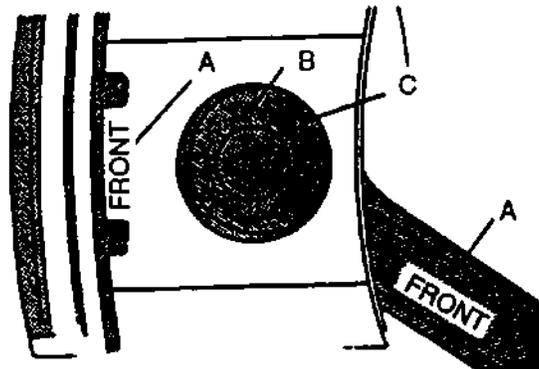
Assembled Piston, Pin, and Connecting Rod
